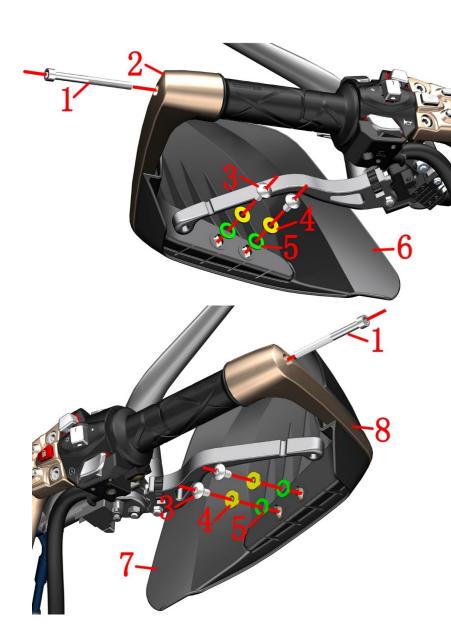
FRONT FORK		Hand guard component	CHK	40)
